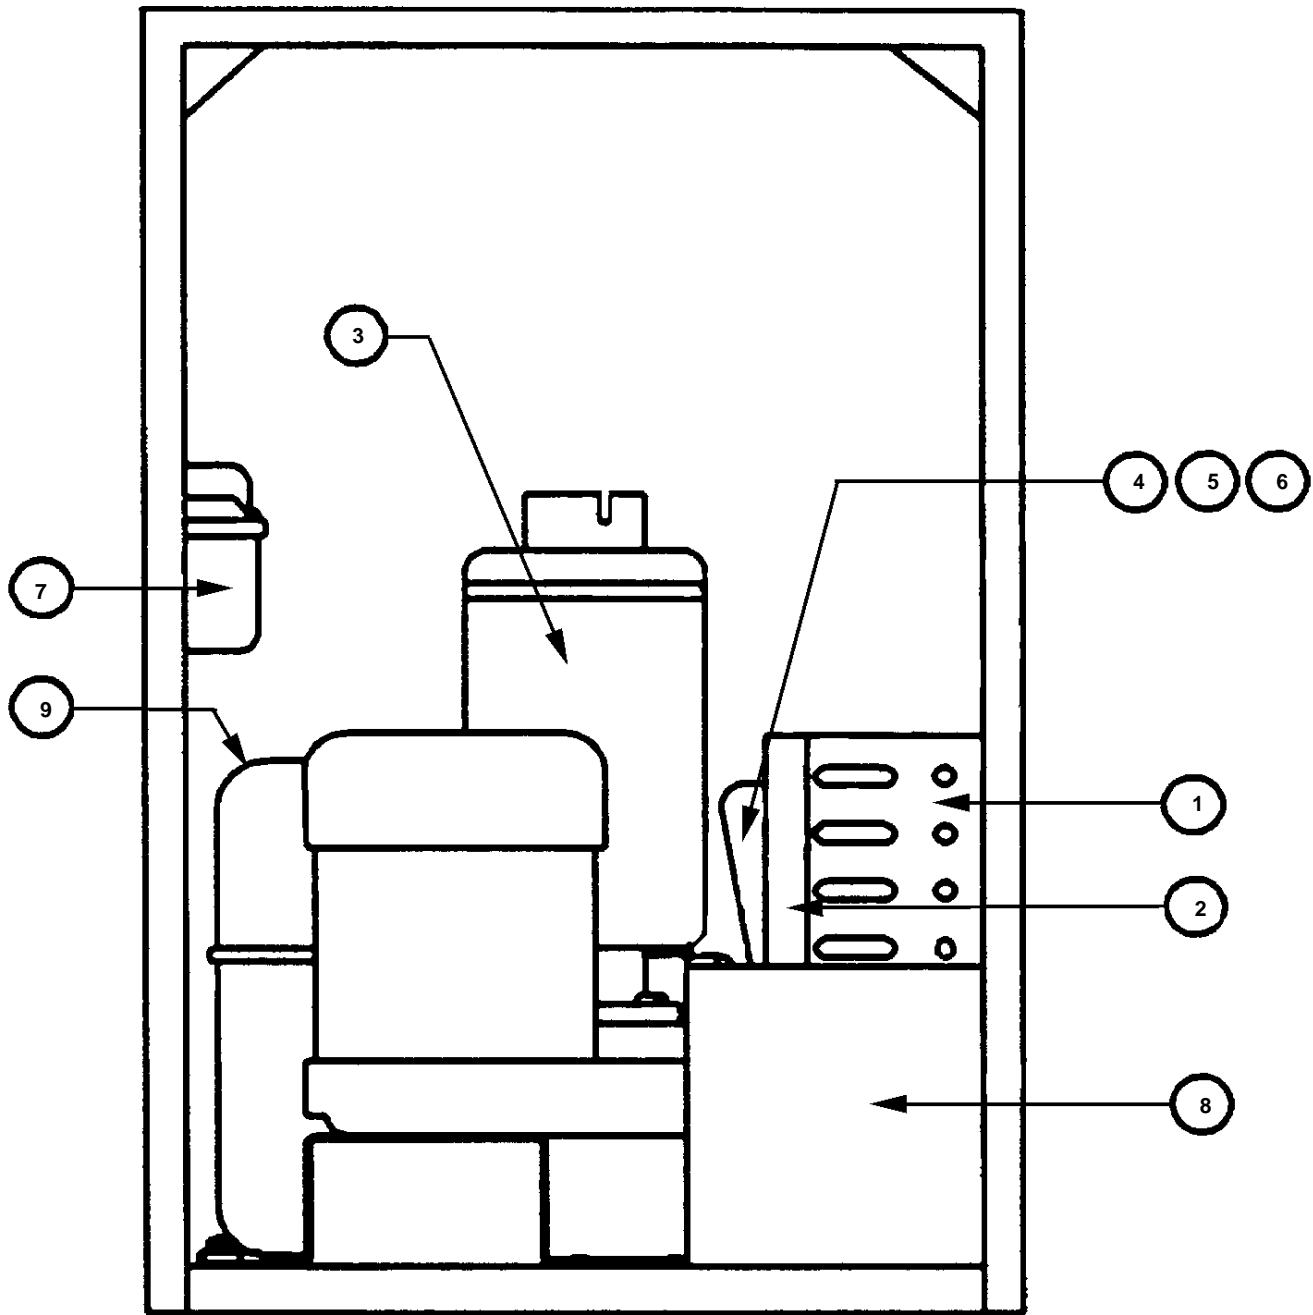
REFRIGERATION AND FRAME ASSEMBLY IMD 600-90
